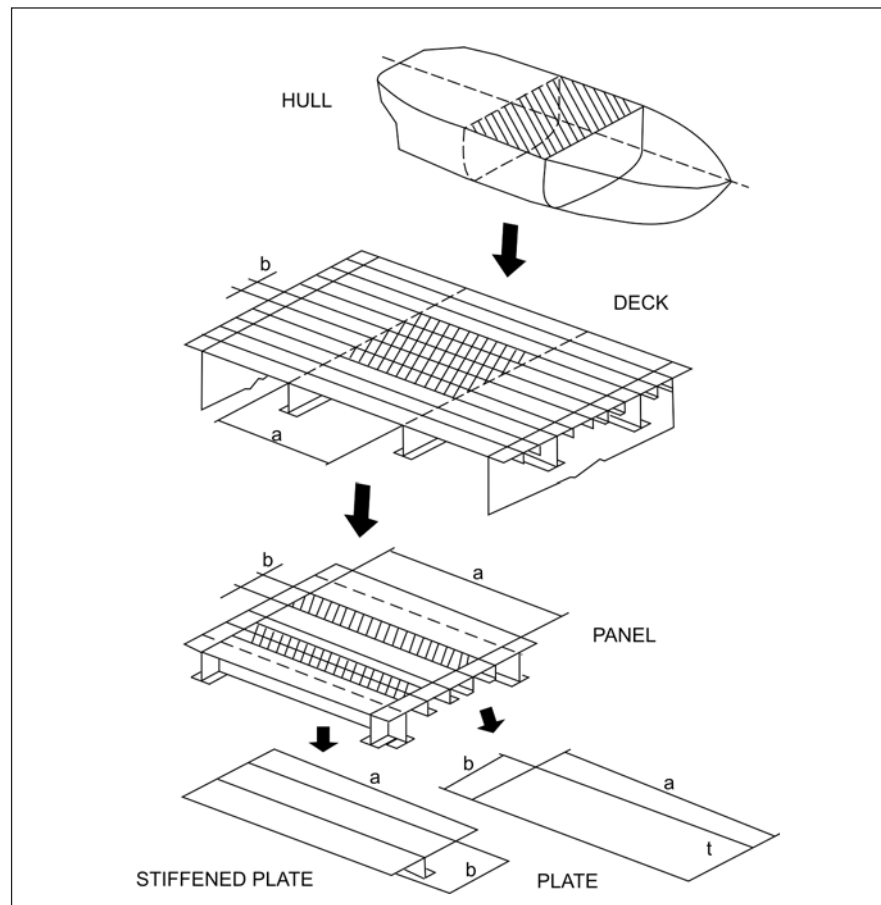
Ship hull girder as a box-like thin-walled stiffened structure.
